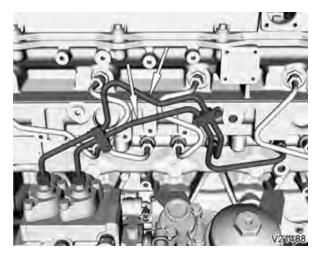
HP Fuel Pump-to-Rail Tube Assembly
